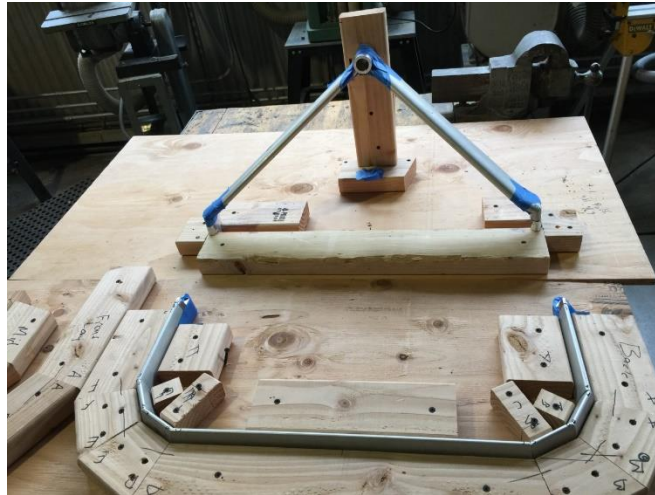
Welding Jigs Built to Keep Tubing in Place
